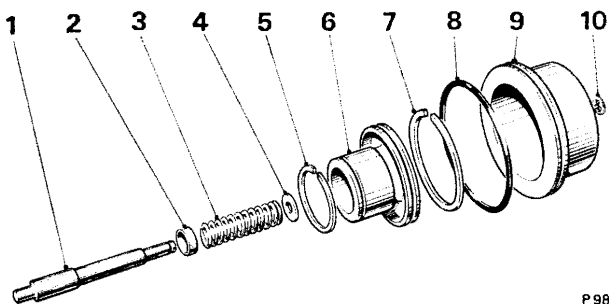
REAR SERVO AND ACCUMULATOR—EXPLODED
